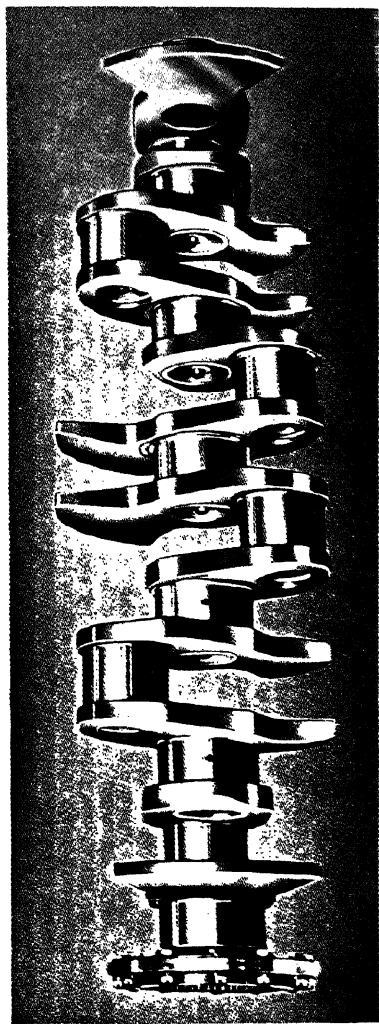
The Rolls Royce "Merlin" engine six-throw crankshaft, showing balance weights, etc.
